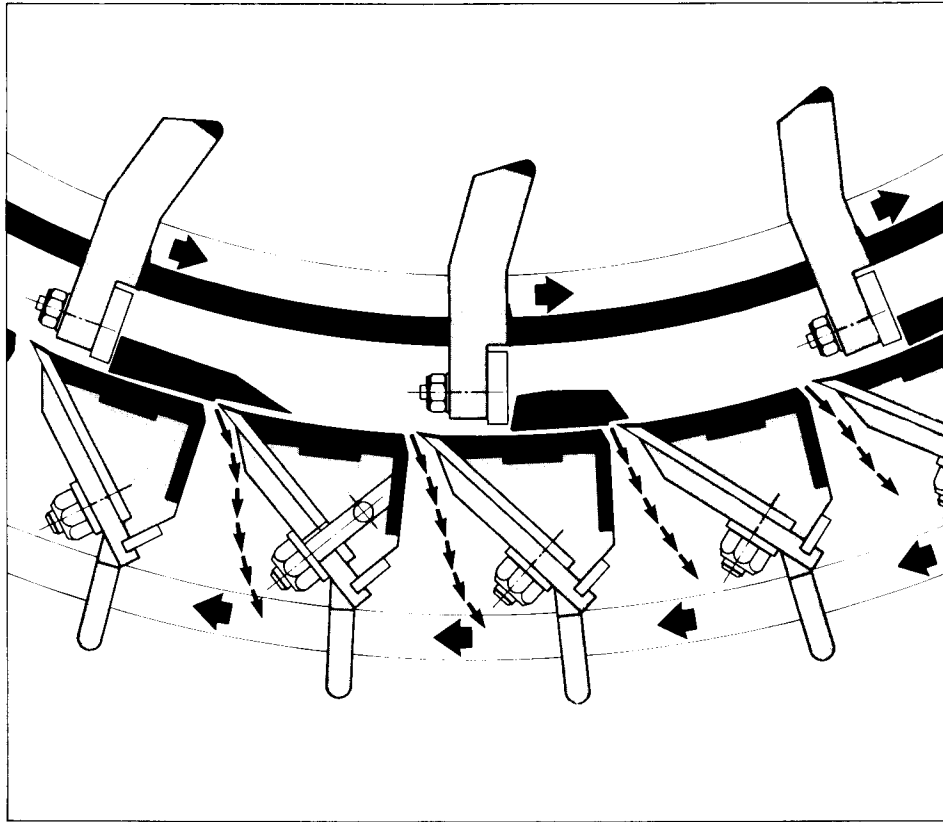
Cross section through a ring flaker designed to accept wood in chip form. The interior rotating impeller forces the chips against the knives of the outer counter-rotating ring. (Drawing after Pallman Pulverizers Company, Inc.)
